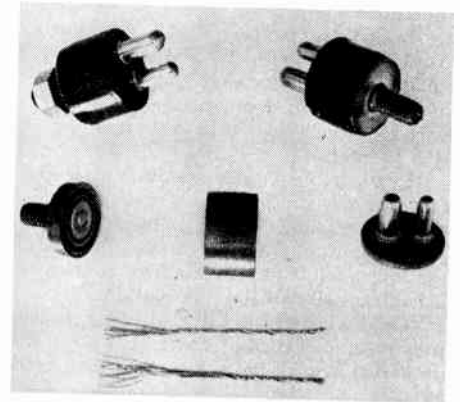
An exploded view of the transistor, with two completed units above. Araldite type D is used to fill the case.
